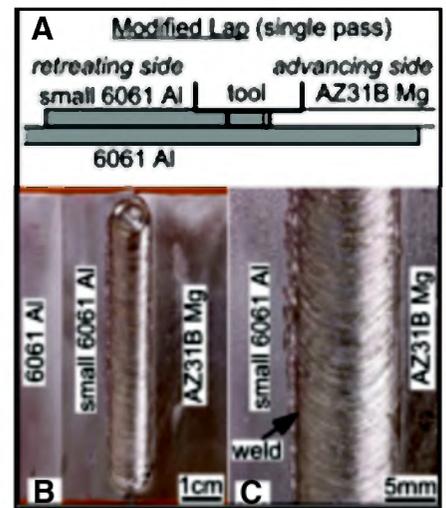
Single-pass weld in a modified lap joint (ML-2) with AZ31 Mg on top of 6061 Al. A — Material position; B — top view overall; C — top view enlarged.
